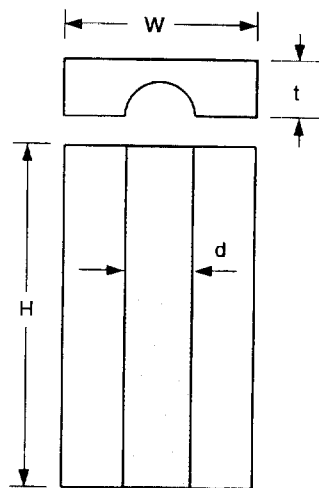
Tab Grip Adapters in ASTM D 3916 for Gripping Smooth FRP Bars in Tensile Tests
